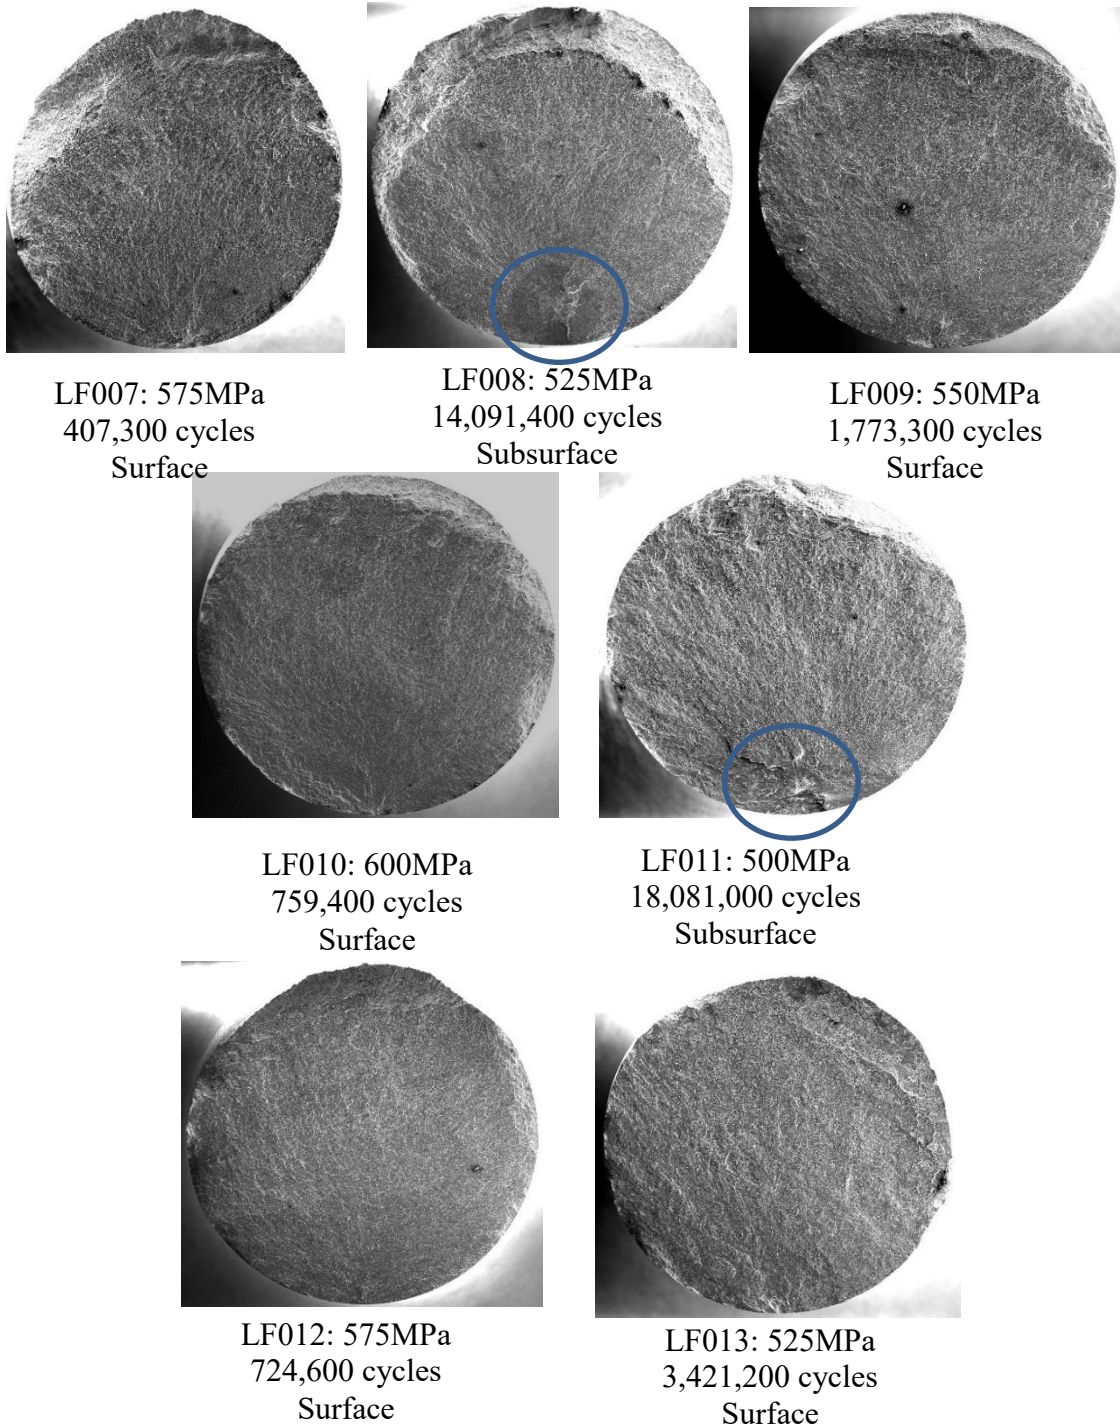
HCF fracture surfaces from manufacturer 1 ring rolled testing.
